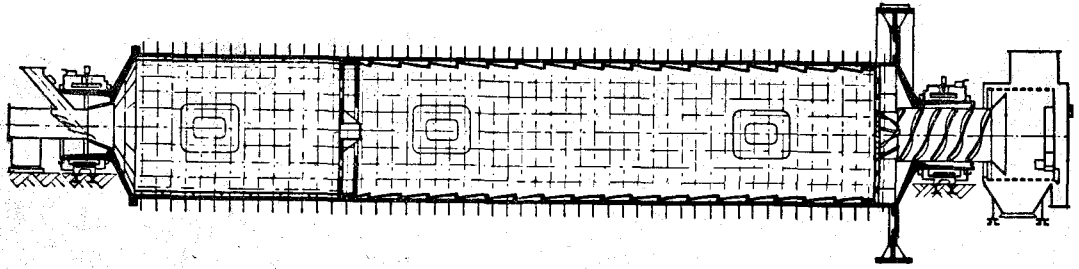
Section of a compound mill with two chambers and a classifying lining
